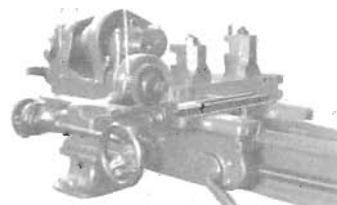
Rack and Pinion Assembly for cut-off Slide
